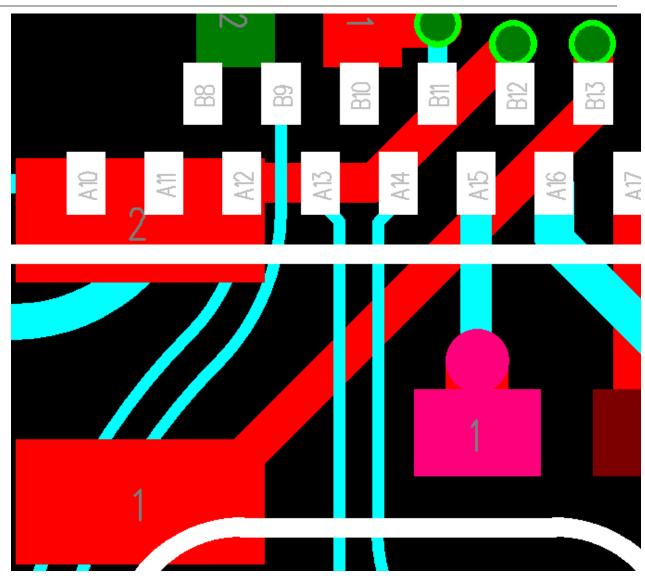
Switching Inductor Layout Recommendation for ATMx221 PCB with Double-sided SMD Components
